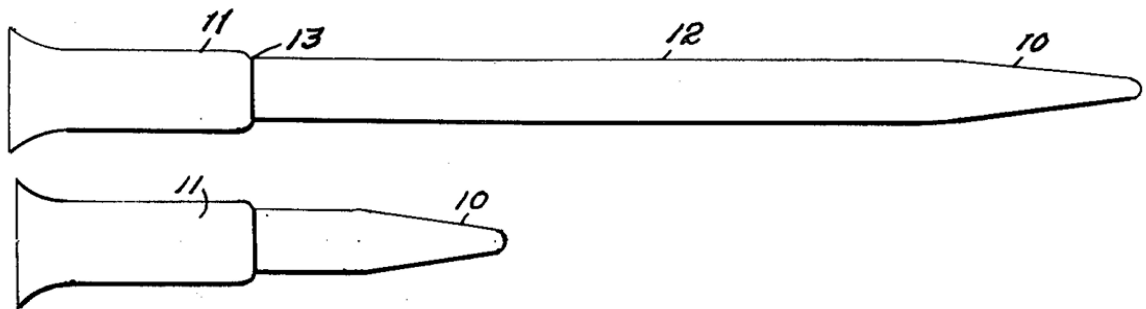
Drawing of an early autophage end-burning solid-propellant rocket concept[17] with the rocket body being fed into the thrust chamber.
